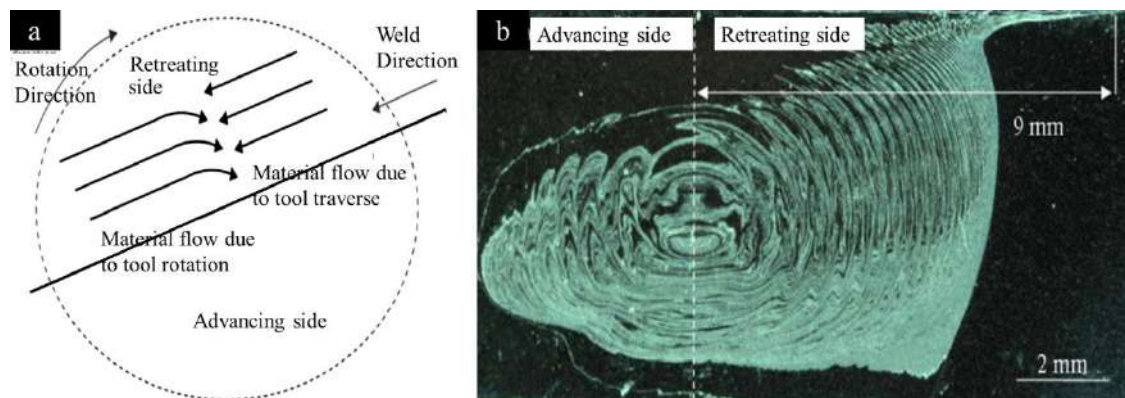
Material flow pattern in FS weld one [Hamilton et al. (2008)] (a) Nugget top region and (b) Nugget cross-section.
